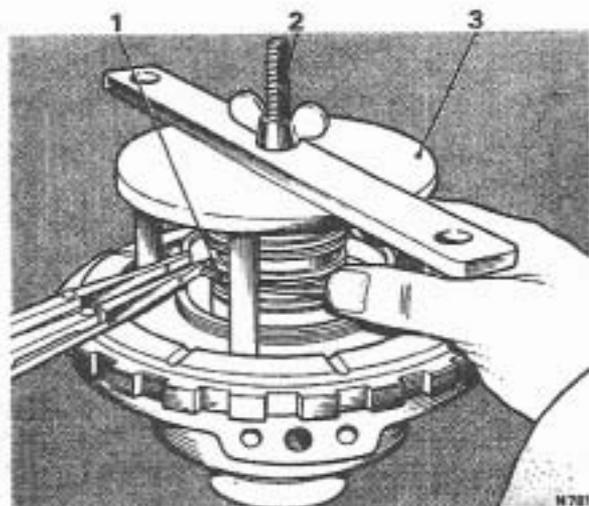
REMOVING AND FITTING THE INTERMEDIATE CLUTCH PISTON SNAP RING
